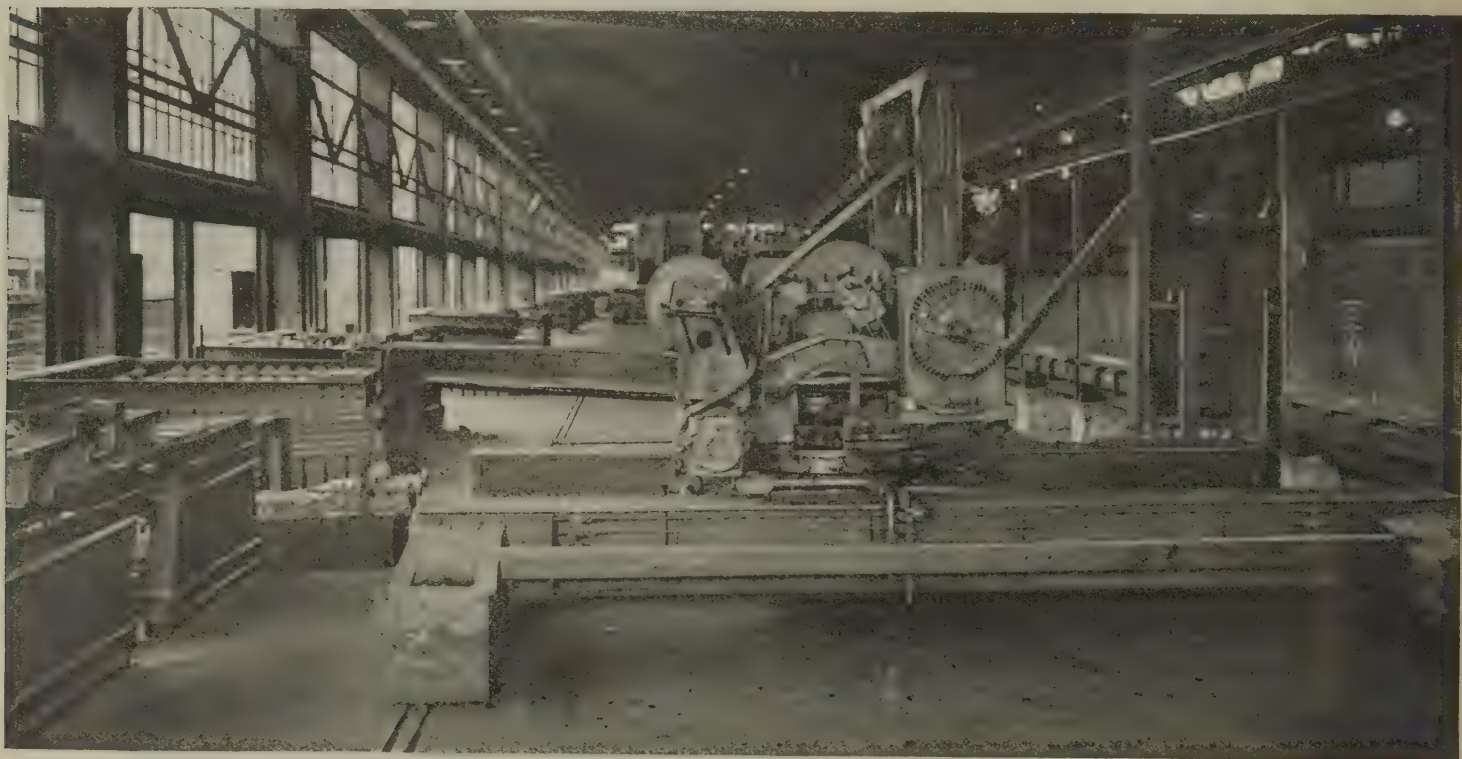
Charging Machine Picking up a Tray Loaded with Forged Crankshafts for Heat Treatment Prior to Machining. Trays are loaded into furnaces at right and emptied by sliding bottom out from under
